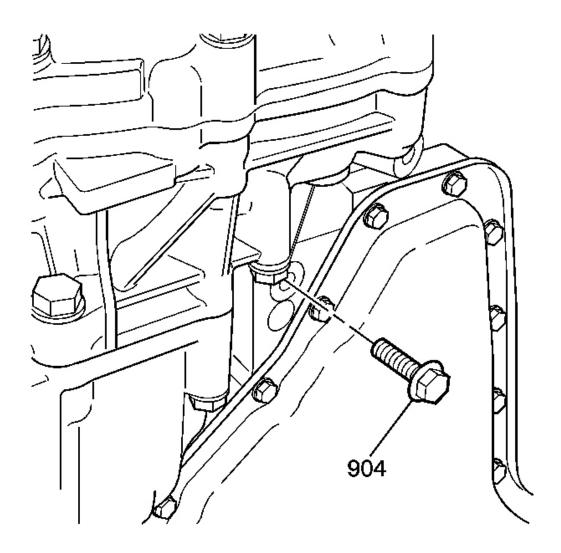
Identifying Transfer Case Lower Brace To Case Bolt Courtesy of GENERAL MOTORS CORP.
